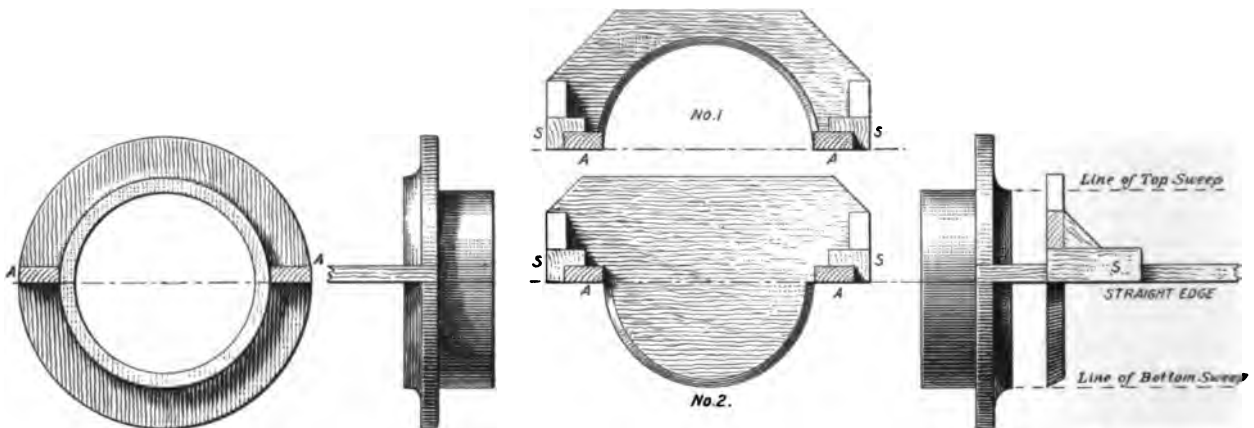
Pattern for Flange and Core Prints, with Straight Edges in Position.
